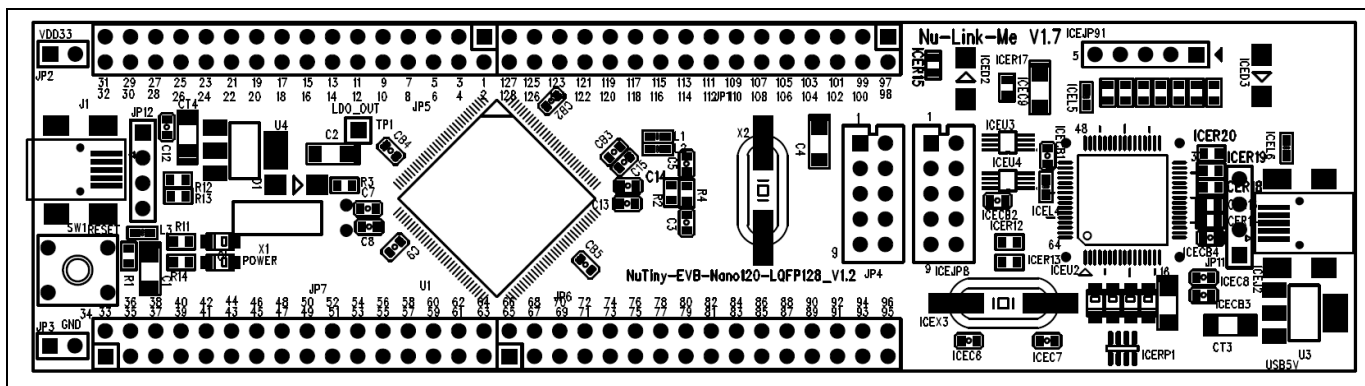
NuTiny-SDK-NANO120 PCB Placement
